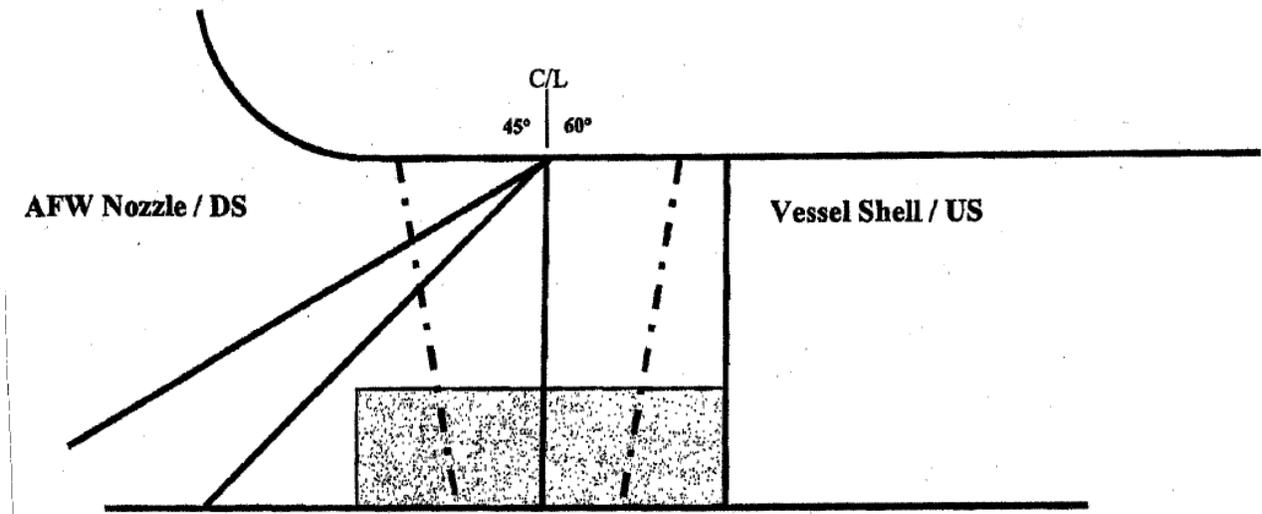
for Steam Generator 4 Nozzle Weld
